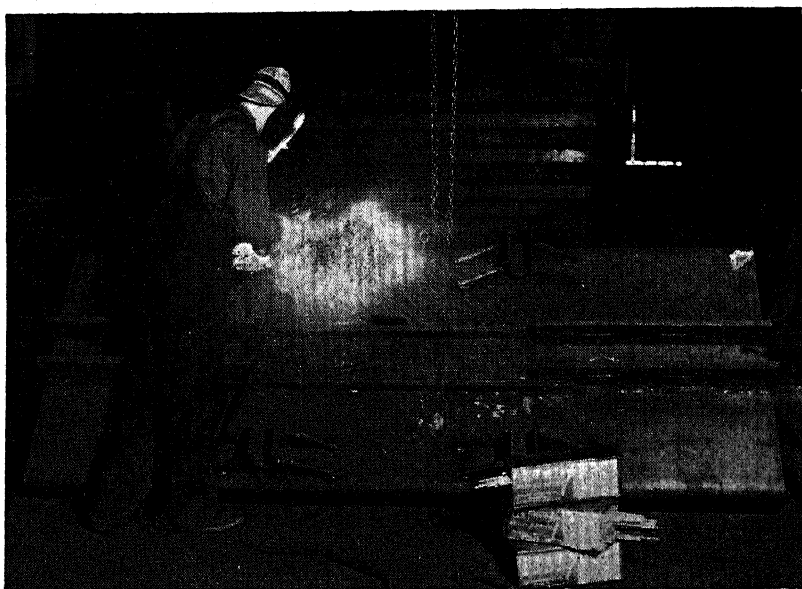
Rebuilding mine cars with welded steel in the maintenance department of a large coal mining company. This construction minimizes dead weight and because of this advantage, welded steel construction is often specified in the purchase of cars and other material handling equipment.
